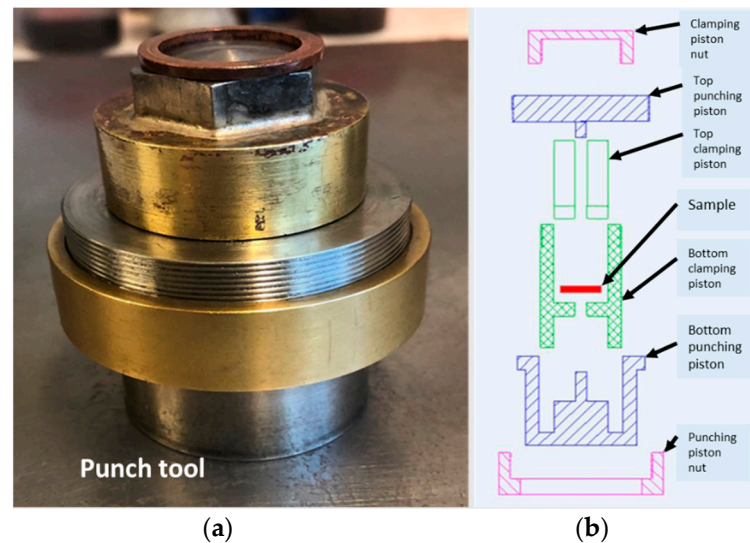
(a) Photograph of the assembled punching tool, (b) disassembled tool drawing showing the different pistons of the tool.
